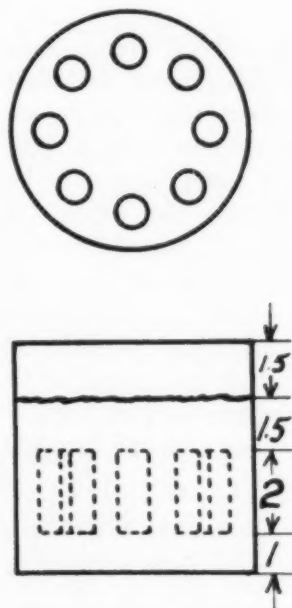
Arrangement of test pieces in carburizing box for carburizing penetration investigation.
